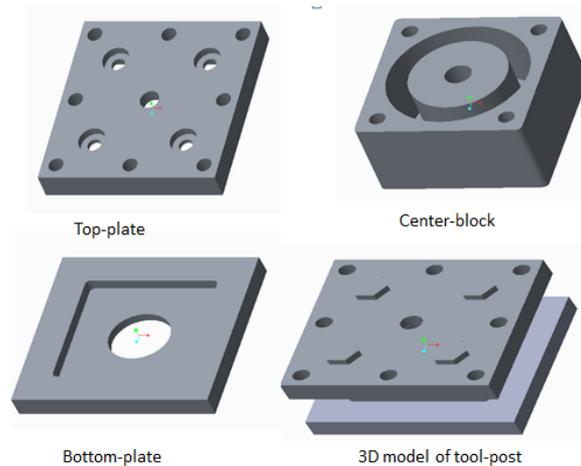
3-D views of individual and assembled parts of proposed tool-post
